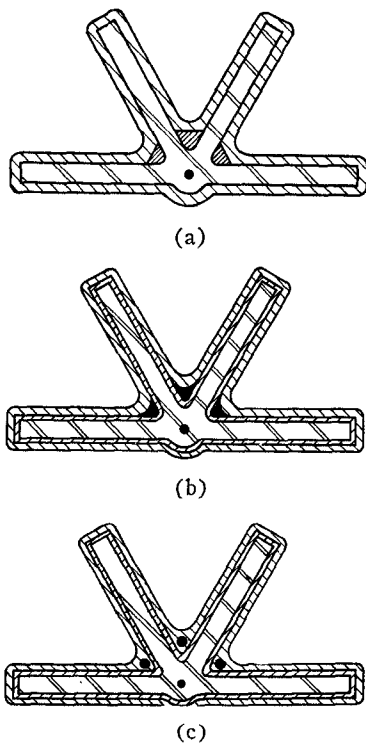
Methods of increasing thickness of deposit in corners; (a) shaped metal inserts, (b) packing by solder, silver powder, amalgams or sprayed metal, (c) drilling out and plugging.
